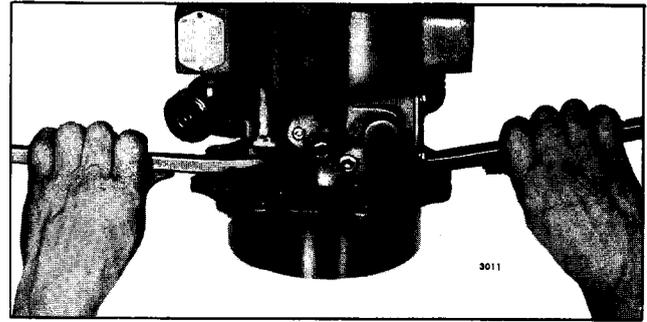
Removing Reduction Gear Input Gear and Bearing Assembly from Reverse Gear Housing (1.5:1)
